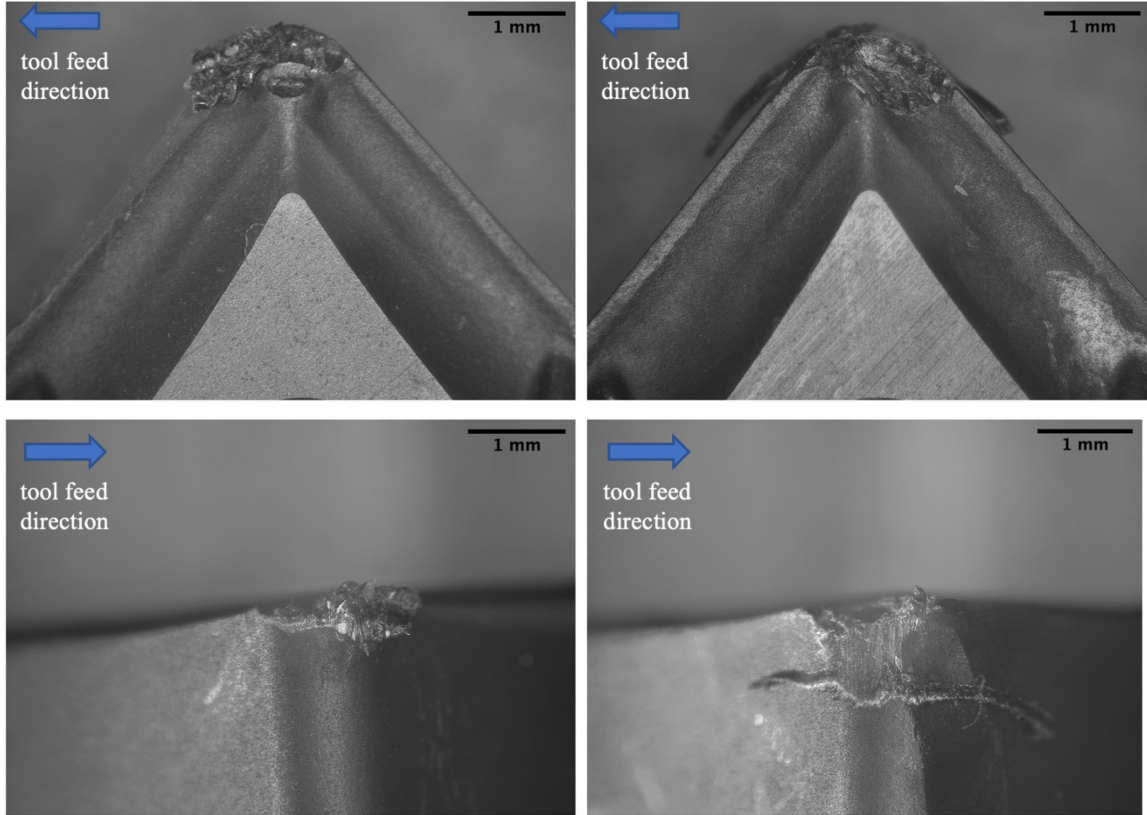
Tools used during cryogenic machining showing presence of workpiece material adhesion
